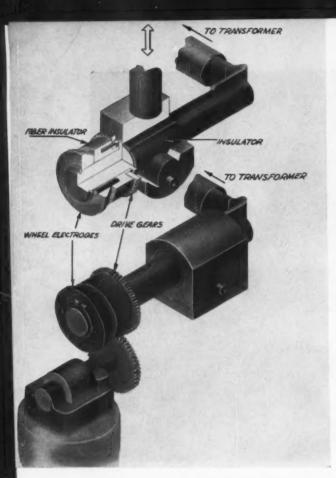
Cutaway view of seam-welding electrode wheels and small, geared driving mechanism.
